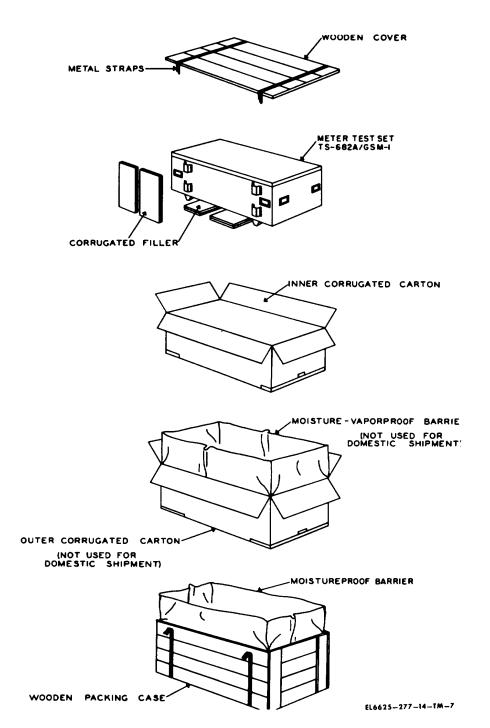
Packaging details for Meter Test Set TS-682(*)/GSM-1
